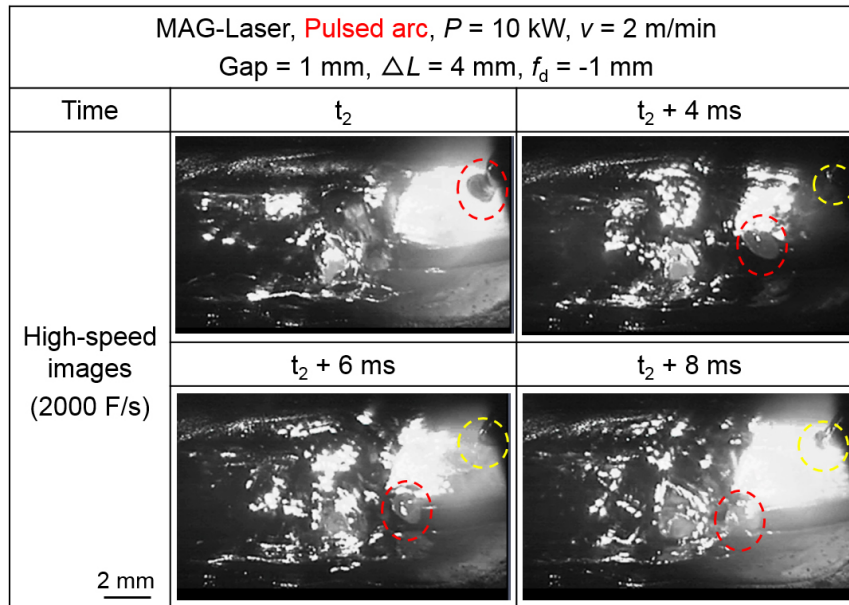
High-speed video observation results of molten surface behavior during hybrid welding with pulsed arc.
